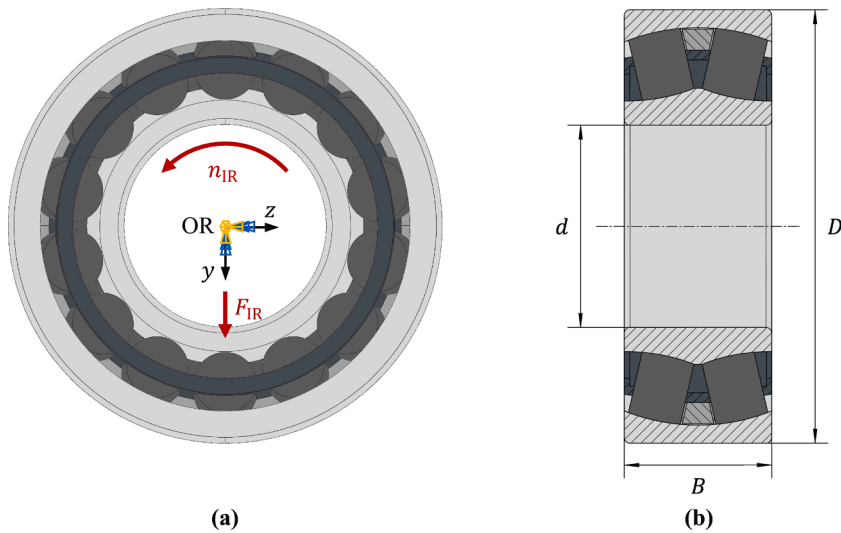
Spherical roller bearing model: (a) boundary conditions and (b) geometric dimensions (see Table 1).
